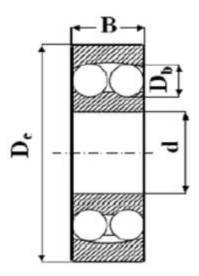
Dimensions of self aligning ball bearing 1205 type [8]
